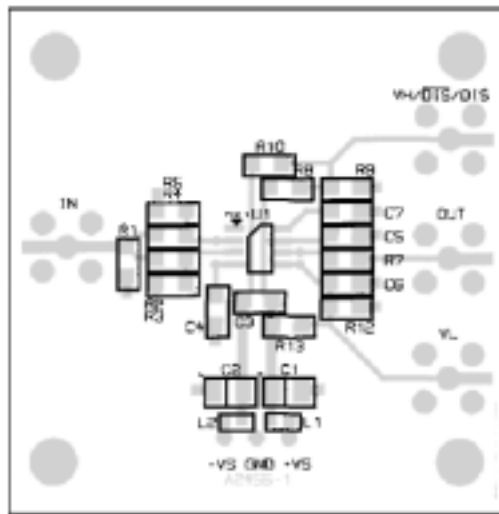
DEM-OPA68xU Demonstration Board; Component Side Silkscreen/Metal
